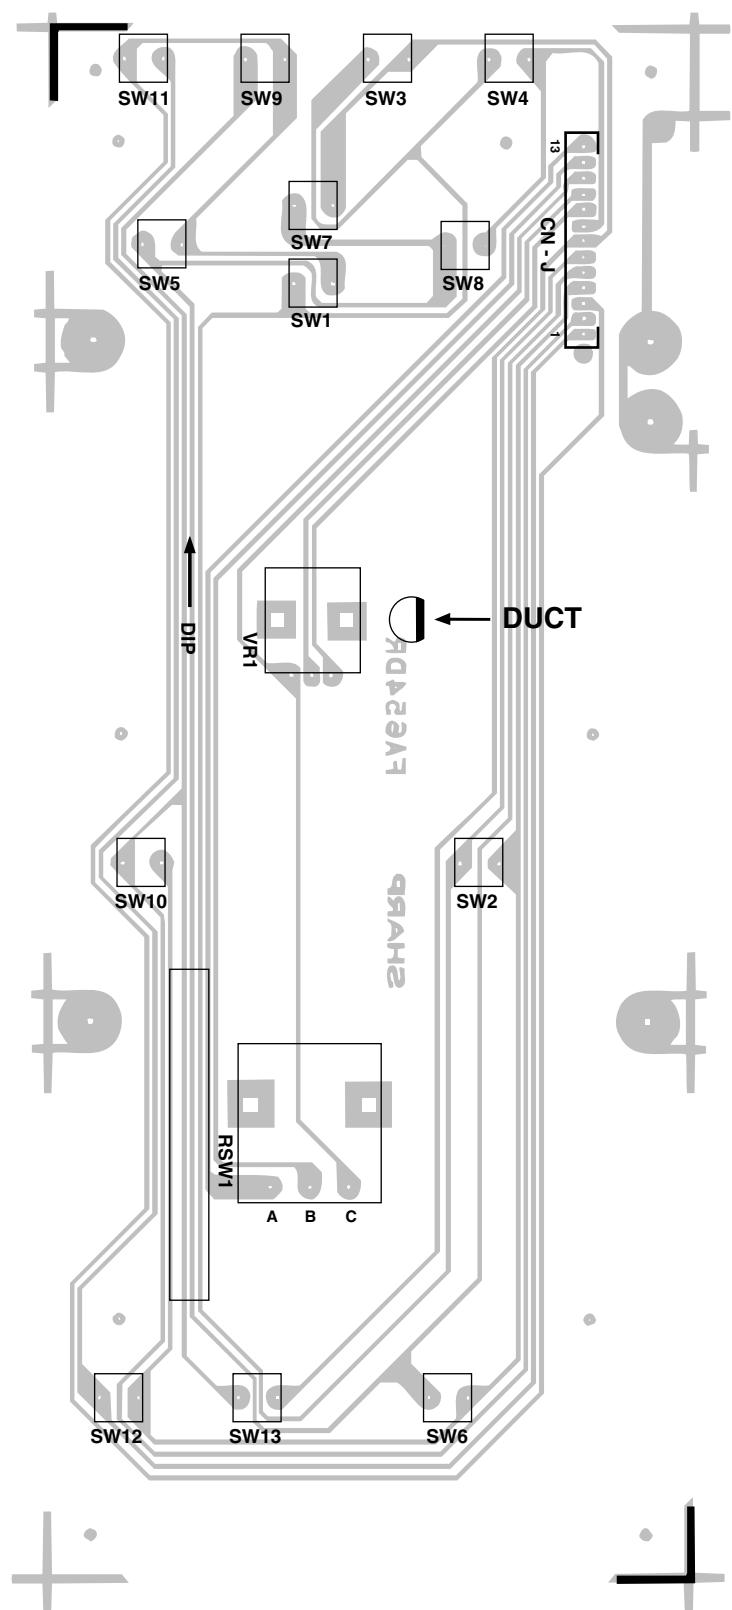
Printed Wiring Board of Jog and Switch Unit
